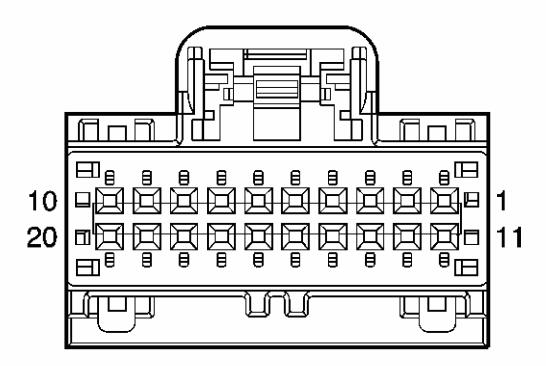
Instrument Panel Cluster (IPC) Connector End View Courtesy of GENERAL MOTORS CORP.
